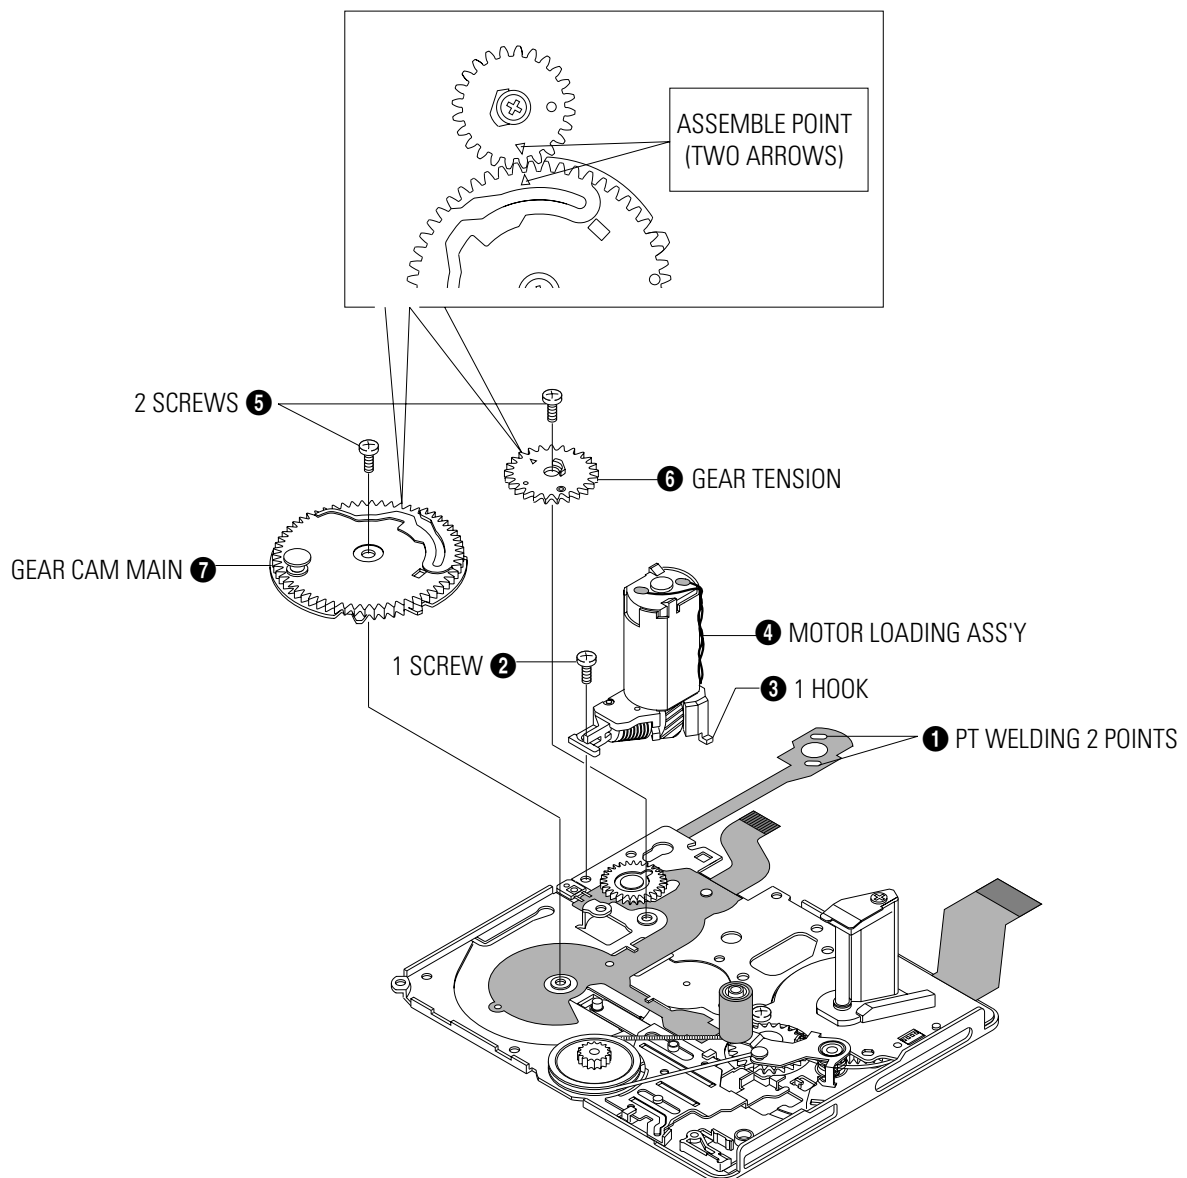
Motor Loading, Gear Tension, Gear Cam Main
